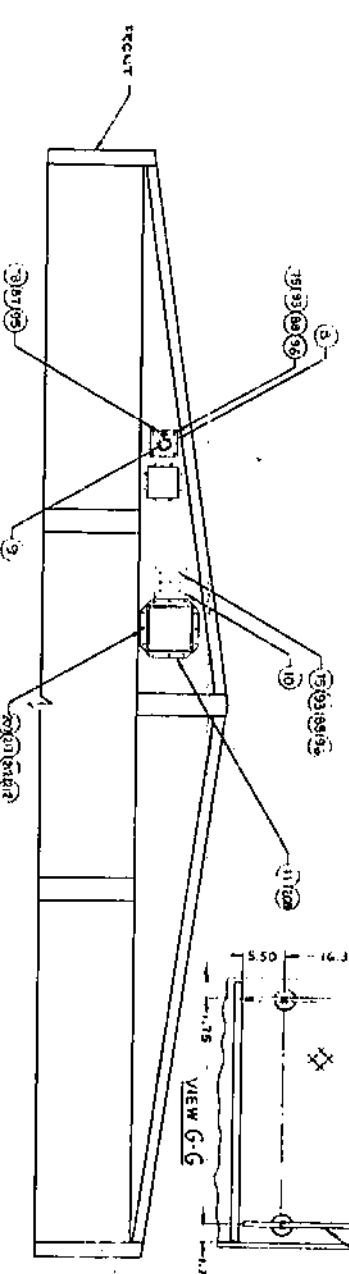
X. Transmitting Group Assembly Drawing (Sheet 1 of 7)
